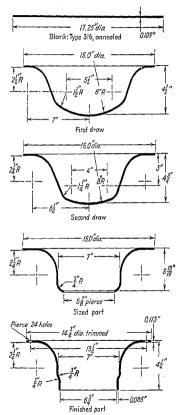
An example of a draw using a high blankholding pressure.2
